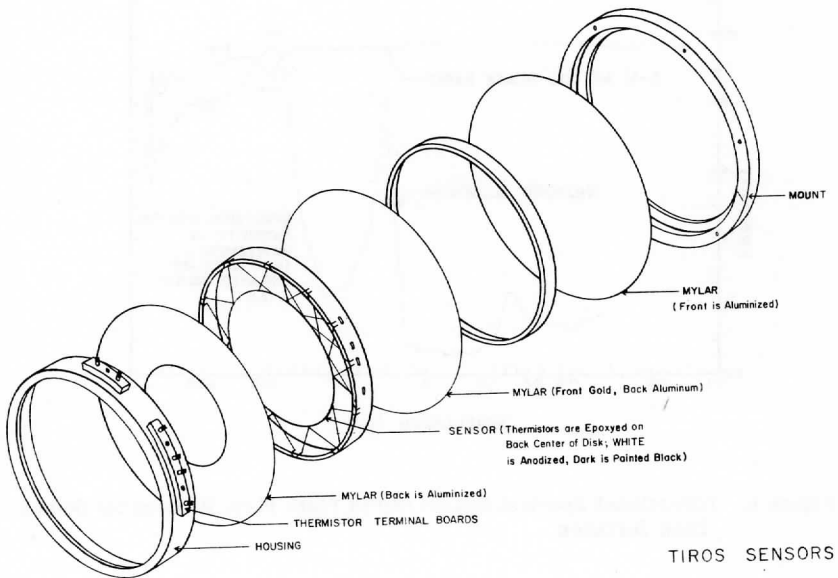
Flat Plate Radiometer Sensor Assembly, Exploded View.
